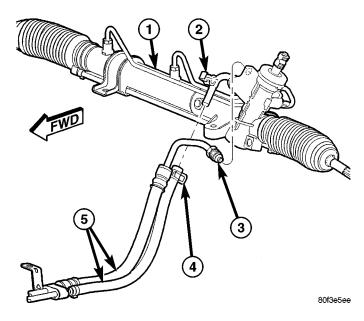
Hoses At Power Steering Gear - 2.4L Turbo
